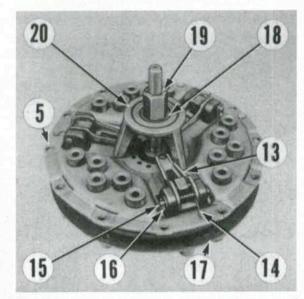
Clutch fixture tool (No. 2142) is used in disassembly and assembly of clutch.
